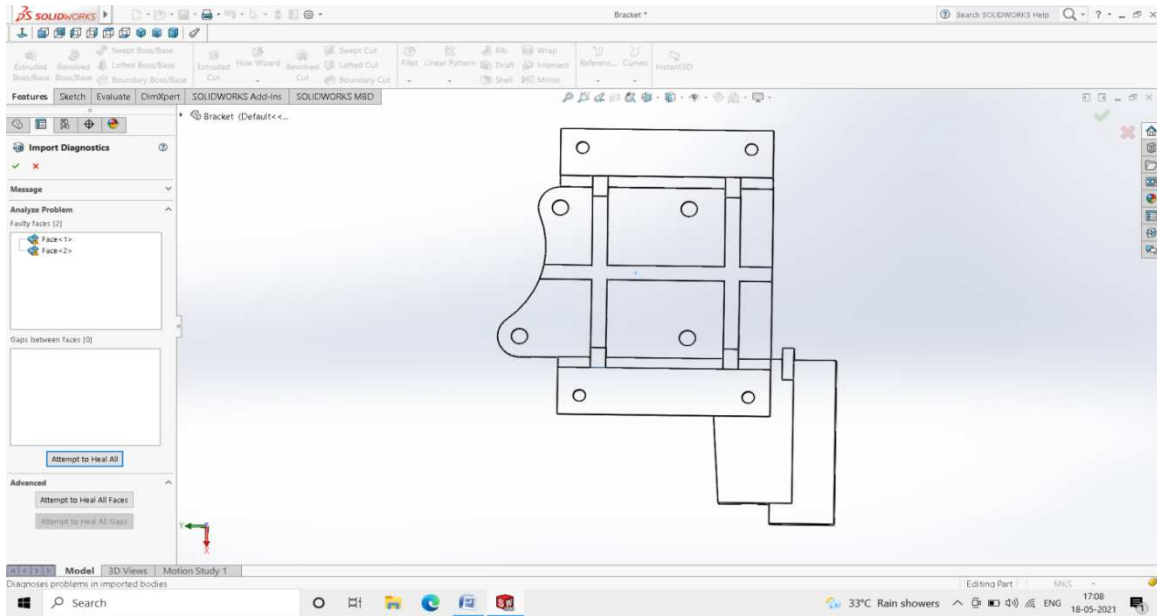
Exiting Bracket 3D wire frame layout on solidwork
